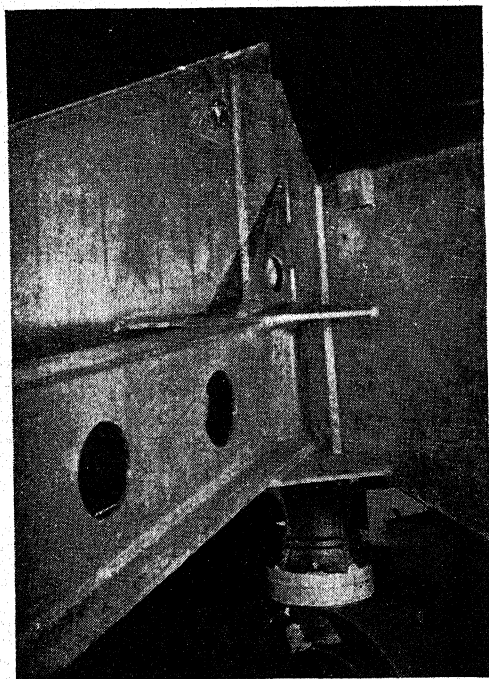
Arc welded joint at intersection of side frame and cross member with X-frame member.
